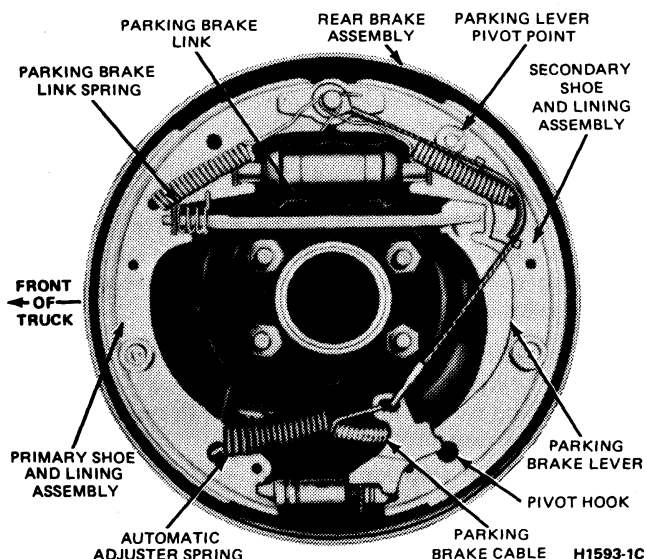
Parking Brake Assembly-Cable Operated—E-100—E-150, F-100—F-150, Bronco
